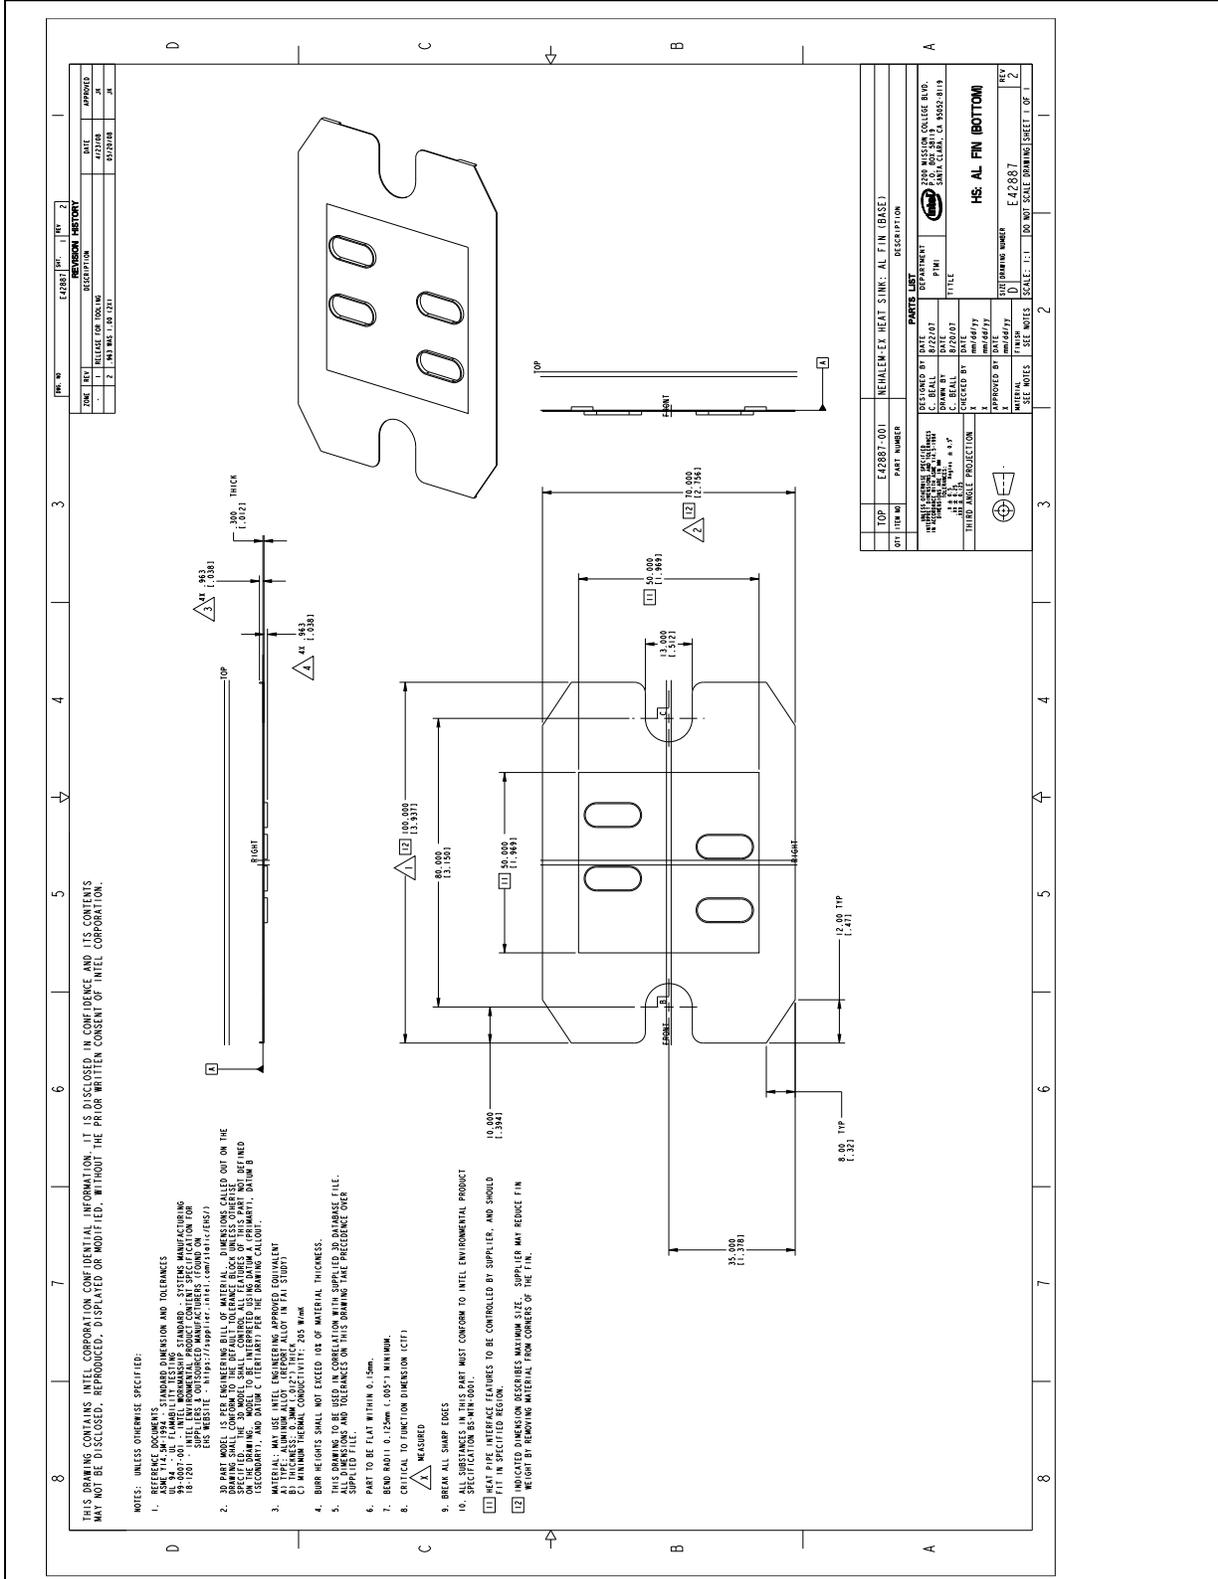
Tower Heatsink Drawing – Sheet 7 of 14
